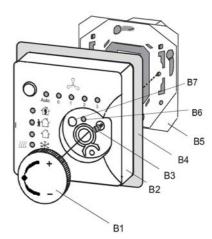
Mounting the Fan-Coil Unit Operator Panel
